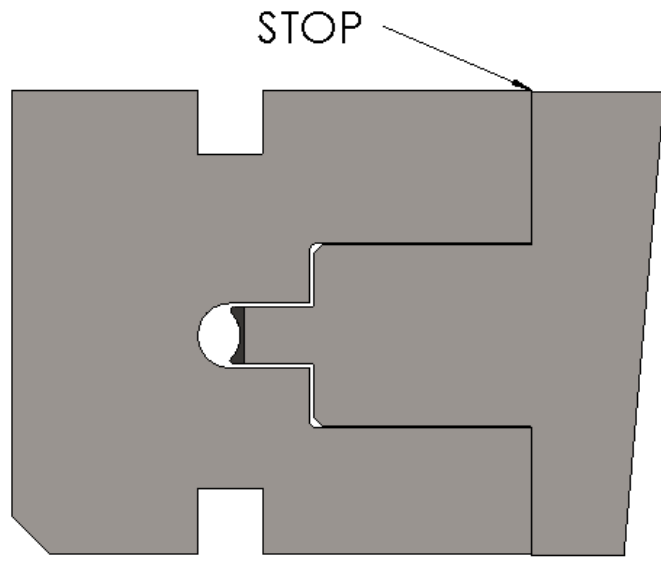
Pressure plates stop when it hits the cable holder.
